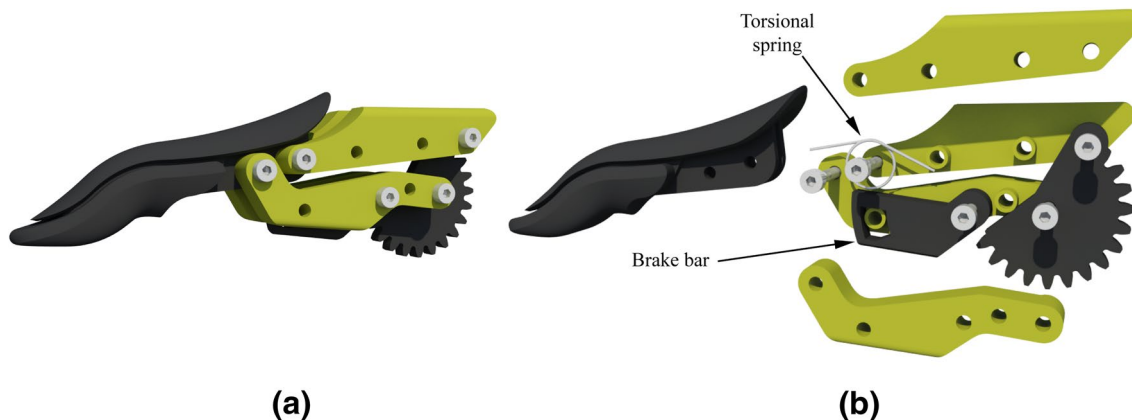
Finger hand design and an exploded view of the internal components of the finger
